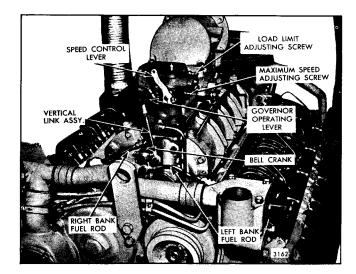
Typical Mounting of Hydraulic Governor Assembly with External Linkage Type Drive
